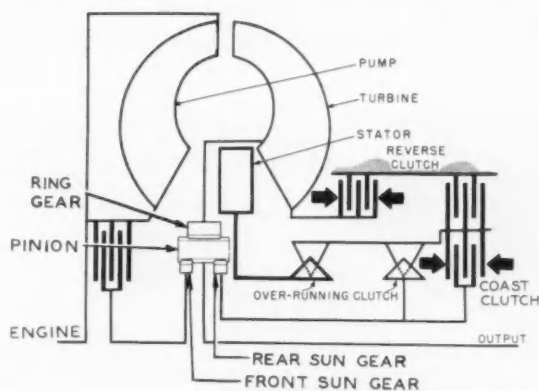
In reverse range, the turbine becomes the torque converter reaction member and drives the stator backwards, the stator becoming the output member.
